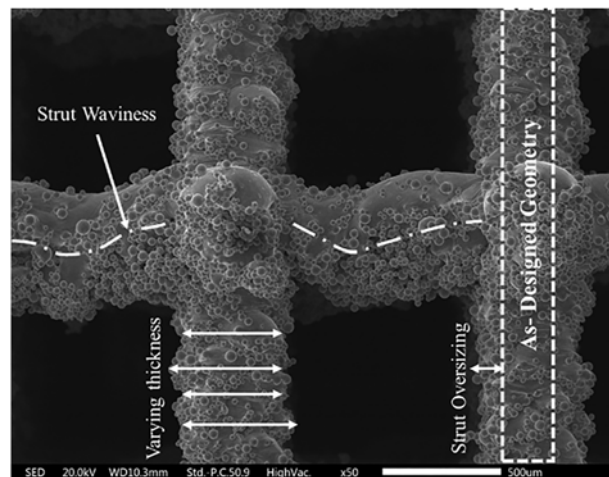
Geometrical defects in the as-built specimen
